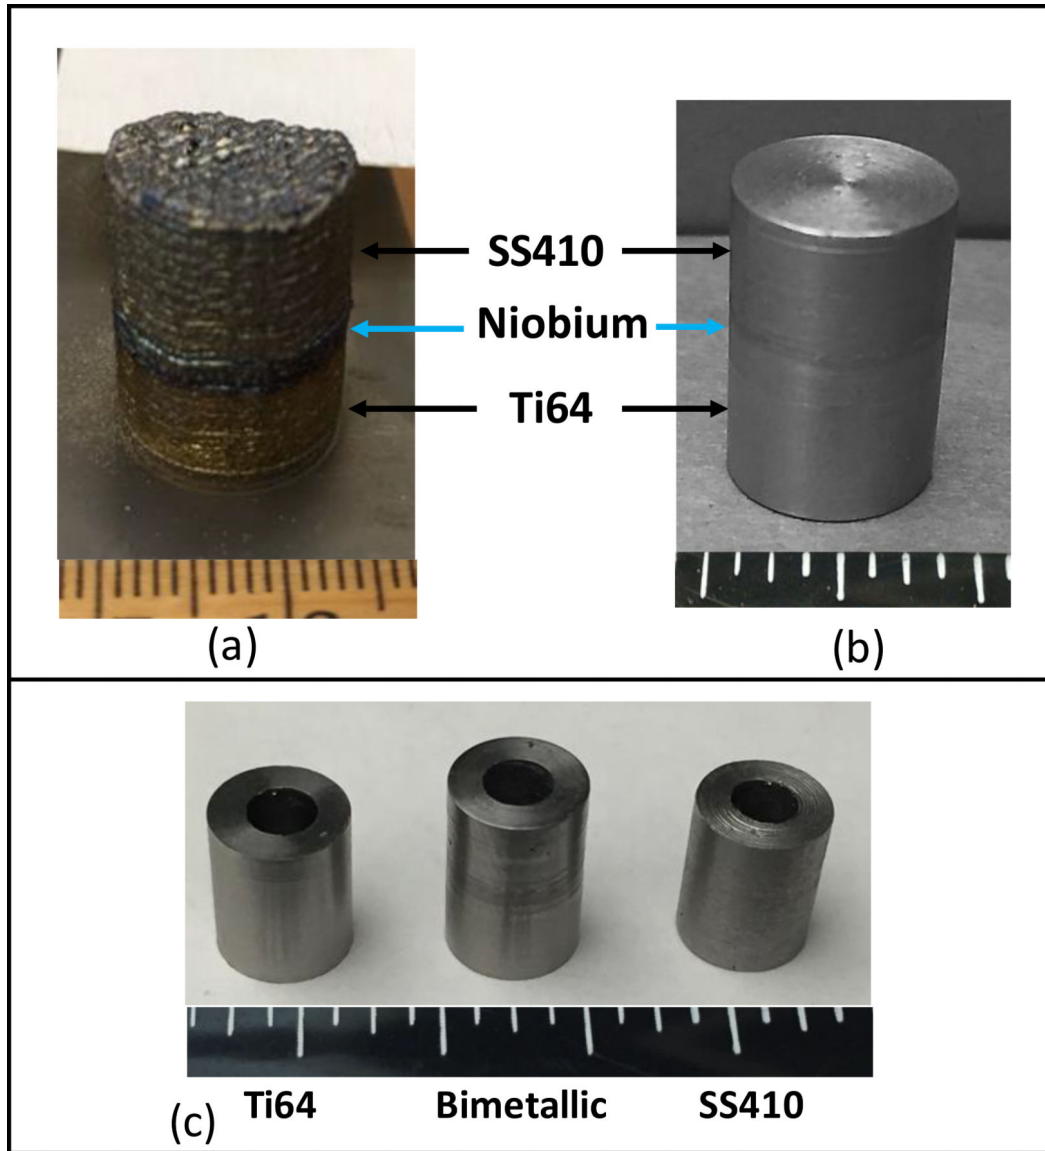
Ti64/SS410 bimetallic joint with Niobium interlayer. (a) As-printed, (b) After machining and (c) Tubes of the base materials and the bimetallic joint.
